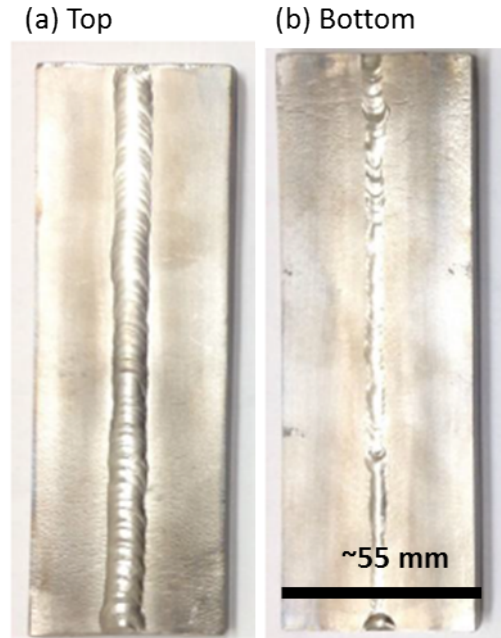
Example of welded test bar. For orientation specification, the wider side of the weld is referred to as the top and the opposite side as the bottom.
